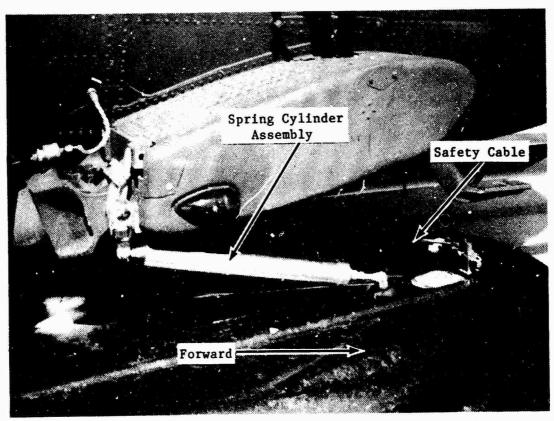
Spring Cylinder Assembly, Main Landing Gear Ski
